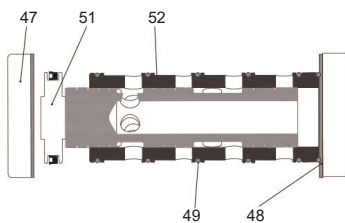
Section View OF Sliding Style Main Valve
